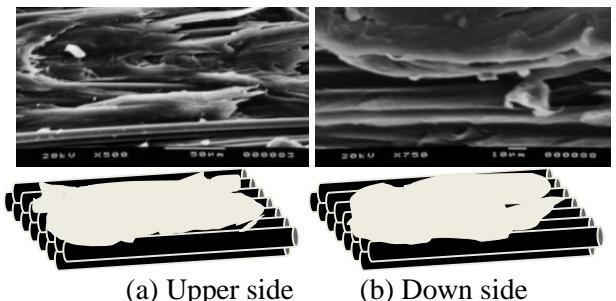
Photographs and schematics of fracture surface of welded specimen with MAPP.
